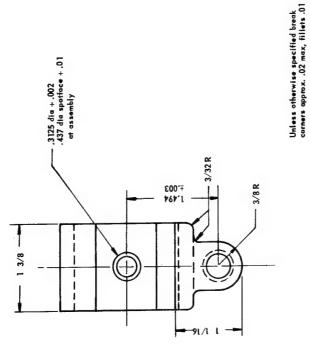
Housing tube connector (Modification of Dwg 7236033)
